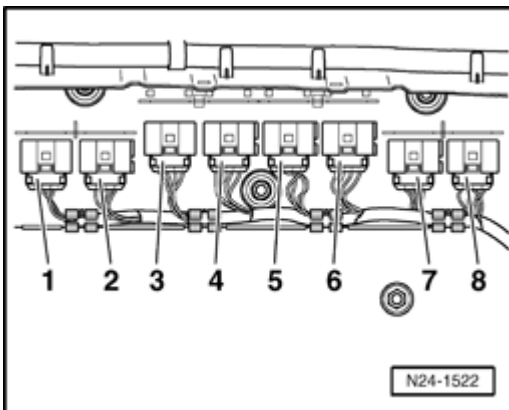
Component Location Of Oxygen Sensors Harness Connectors For Bank 1
